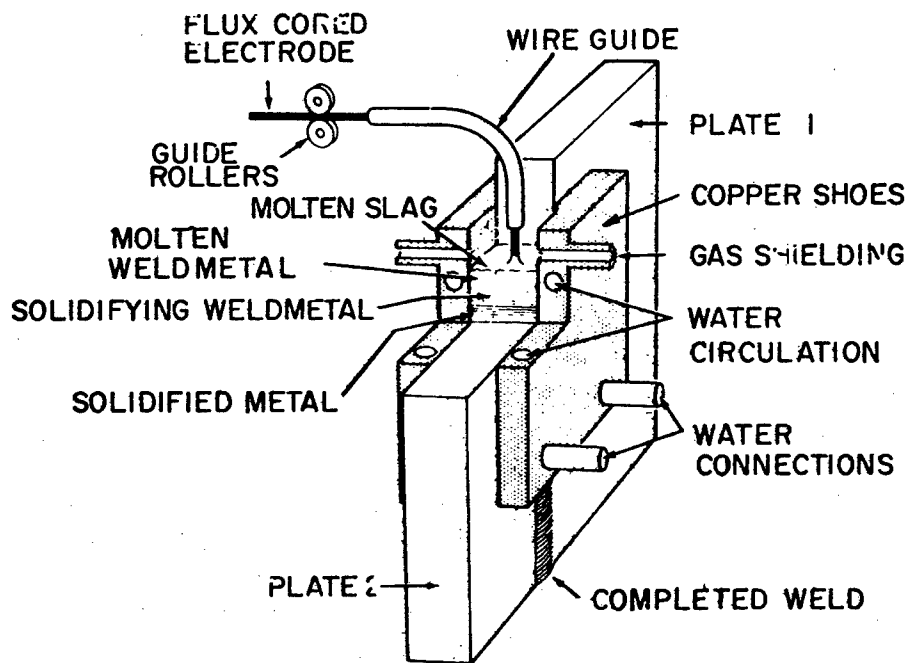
SCHEMATIC DRAWING OF ELECTROGAS WELDING PROCESS
